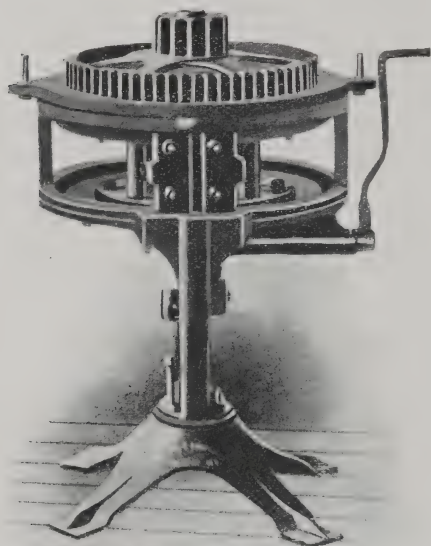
A "FRIDMORE ROUND-STAND MACHINE, 16 IN. DIAMETER, WITH GEAR AND PINION PATTERN.
